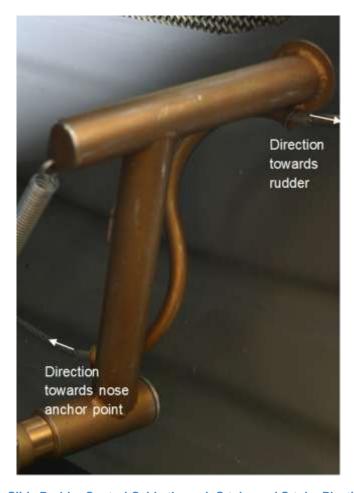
Slide Rudder Control Cable through S-tube and S-tube Plastic Insert
